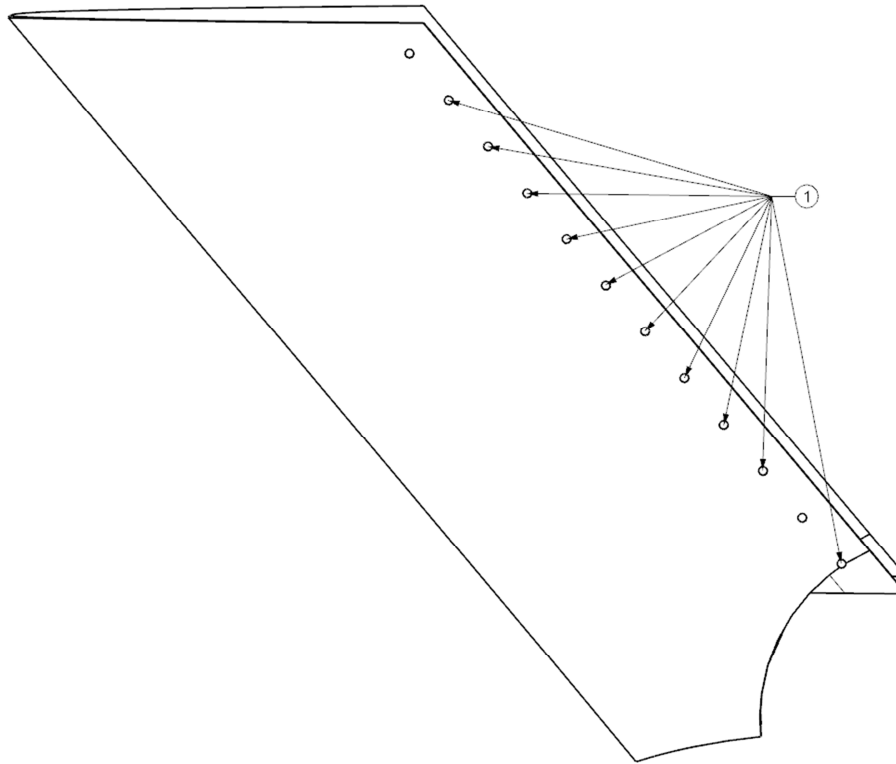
Inboard Wing Pylon Leading Edge Fastener Placement
